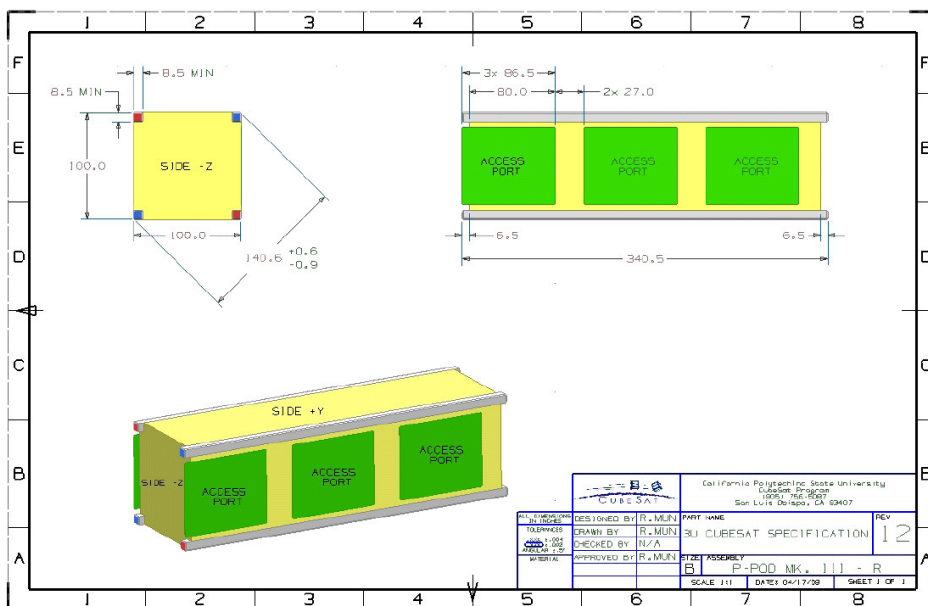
CubeSat Design Specification Mechanical Drawings
